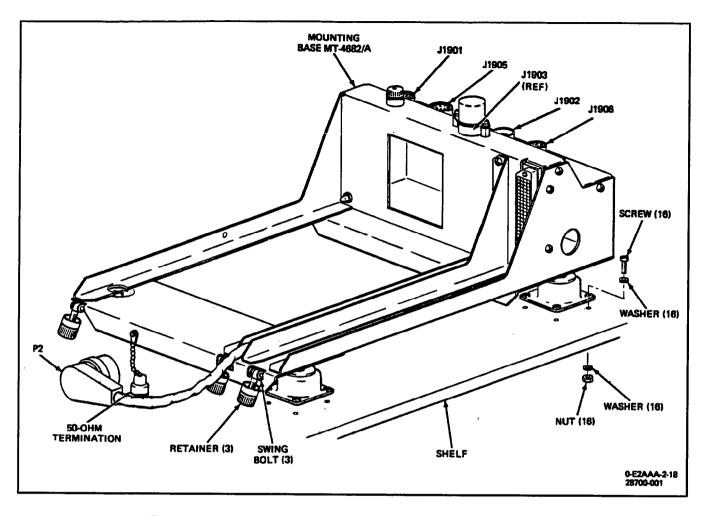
Removal and Installation of Mounting Base MT-4682/A
